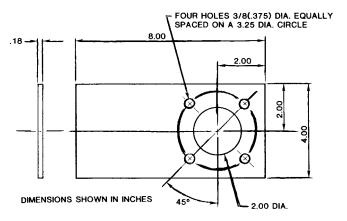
HGF Service Assembly Fixture (To Be Fabricated By Customer)
